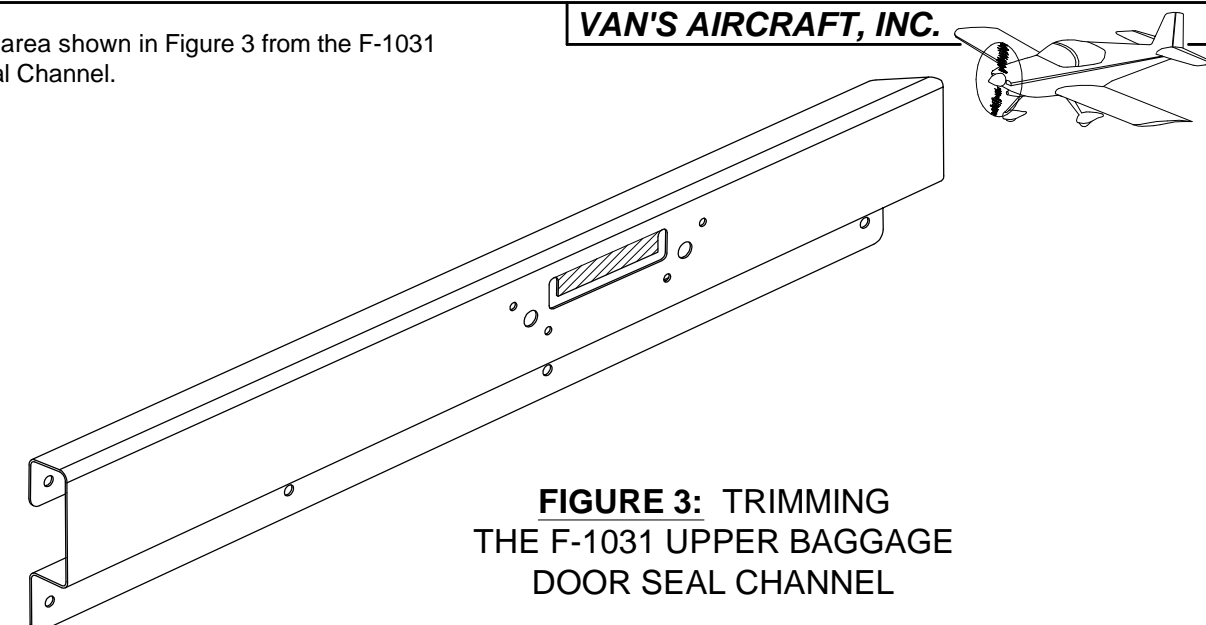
TRIMMING THE F-1031 UPPER BAGGAGE DOOR SEAL CHANNEL
